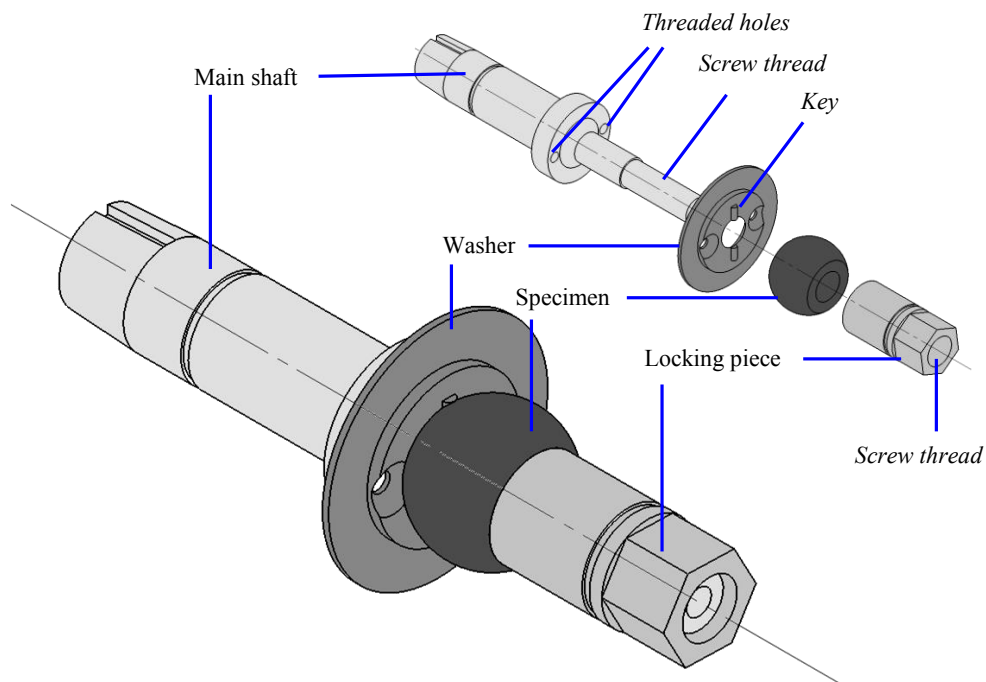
Drawings of the upper specimen shaft assembly in its exploded and assembled forms.
